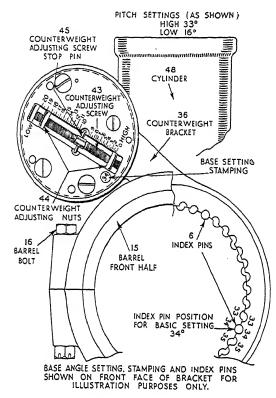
Sketch of counterweight bracket showing blade-angle adjustment
